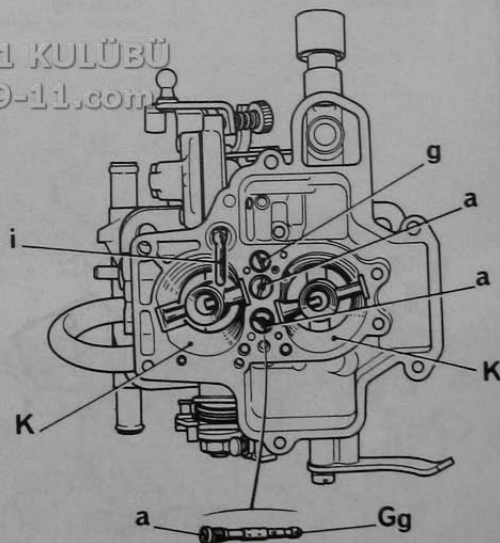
Weber carburettor overhaul (Sec 18)
